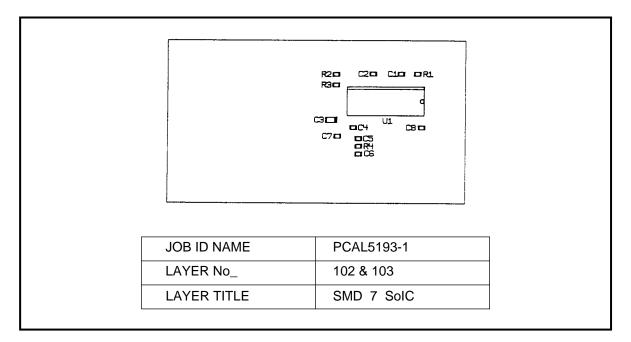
PCB Lay-Out Component Side of the SAA7710T Plug-In Module
